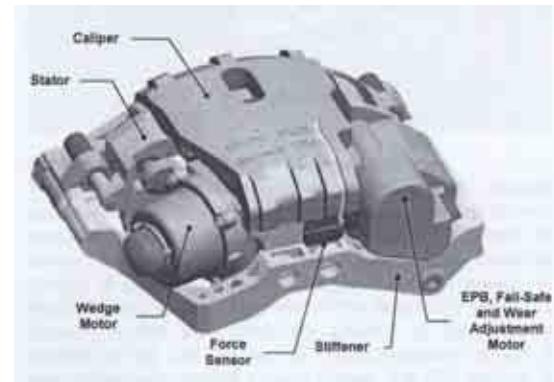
PT1 prototype of Siemens VDO (90kN/4500Nm)
